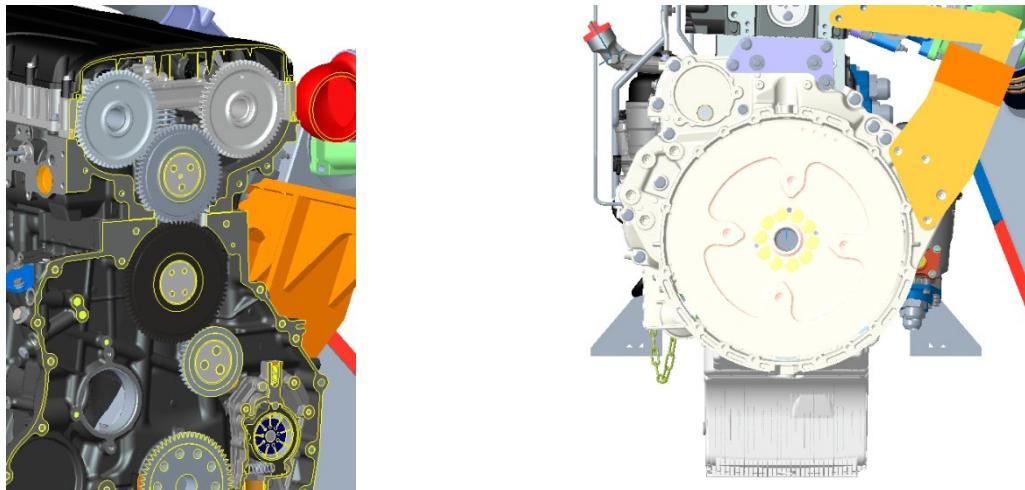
Increase in Deck Height Idler Gear and Flywheel Bracket
